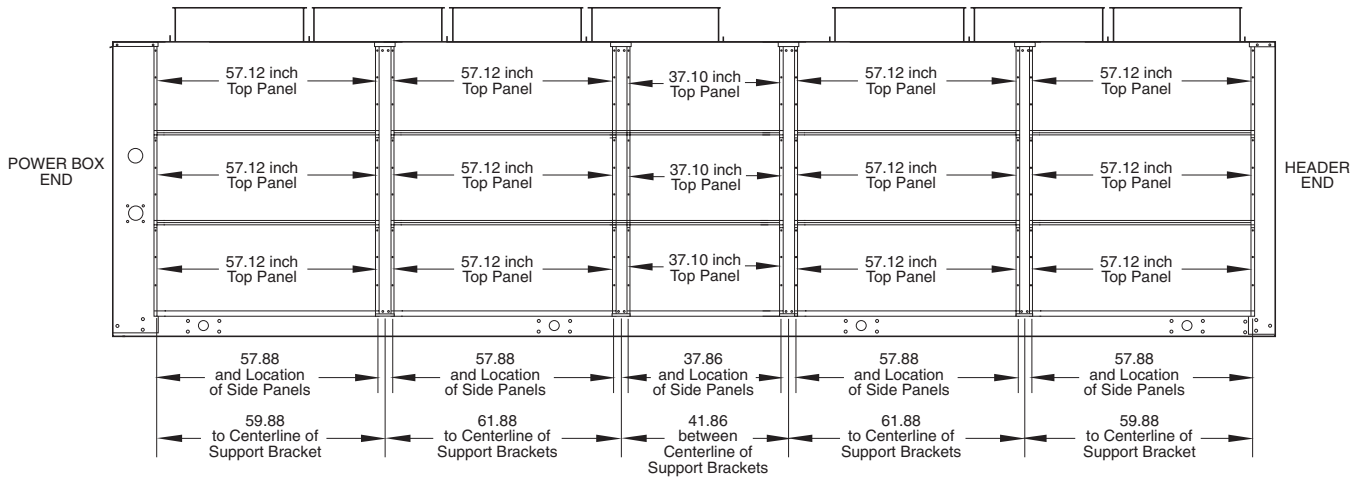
E — Unit Assembly, 30GXN,R163,178 and Associated Modular Units — Both Sides
